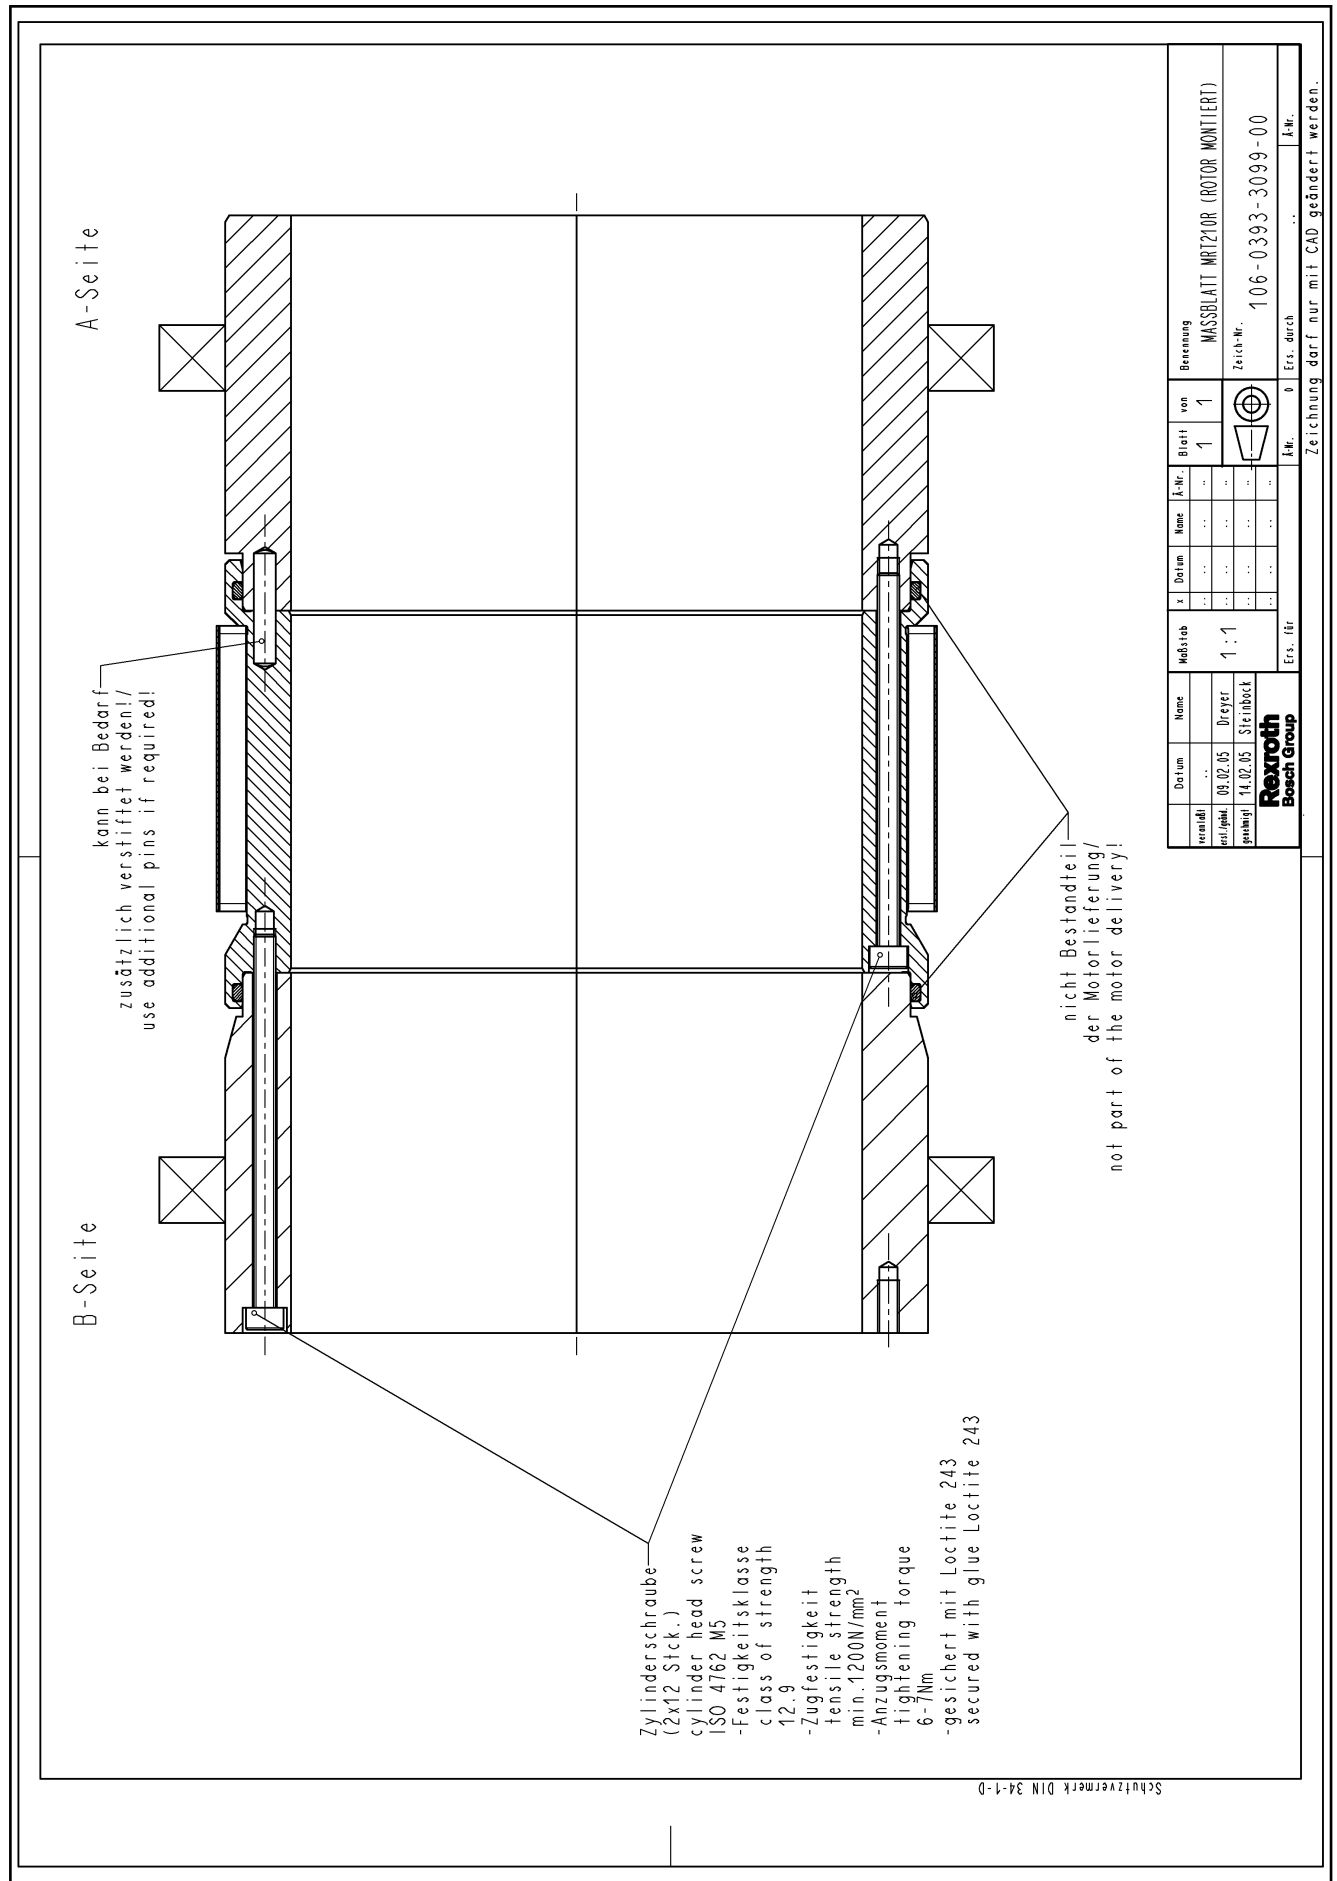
Dimension sheet for rotor MRT210R, mounted
